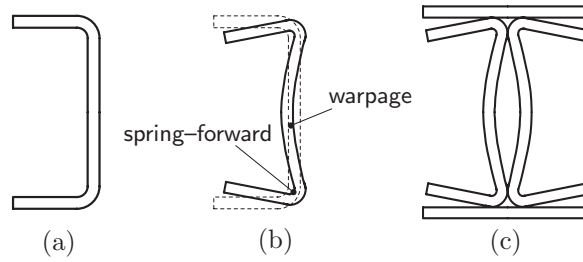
Spring-forward and warpage of a C-shaped part: (a) intended geometry, (b) distorted geometry and (c) problematic assembly into an I-section
